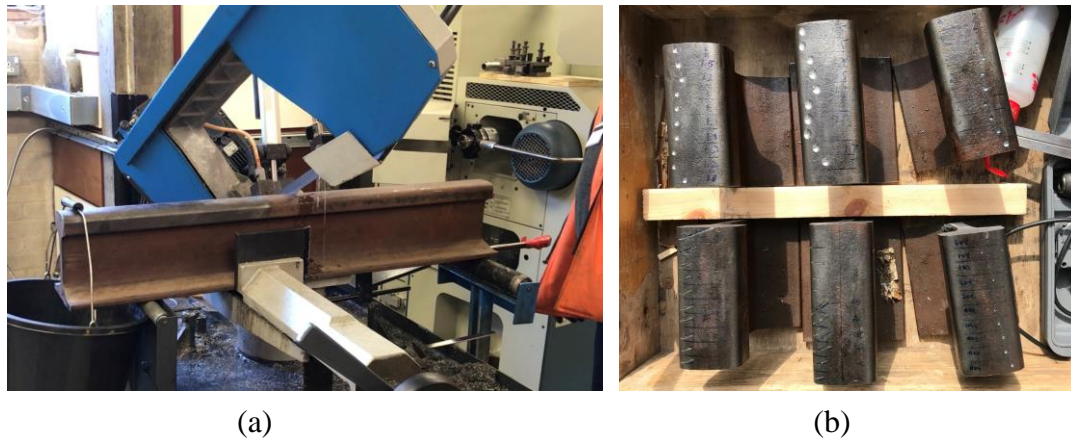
Defective sample preparation: (a) machining a rail sample in the workshop; (b) some machined samples with artificial defects
